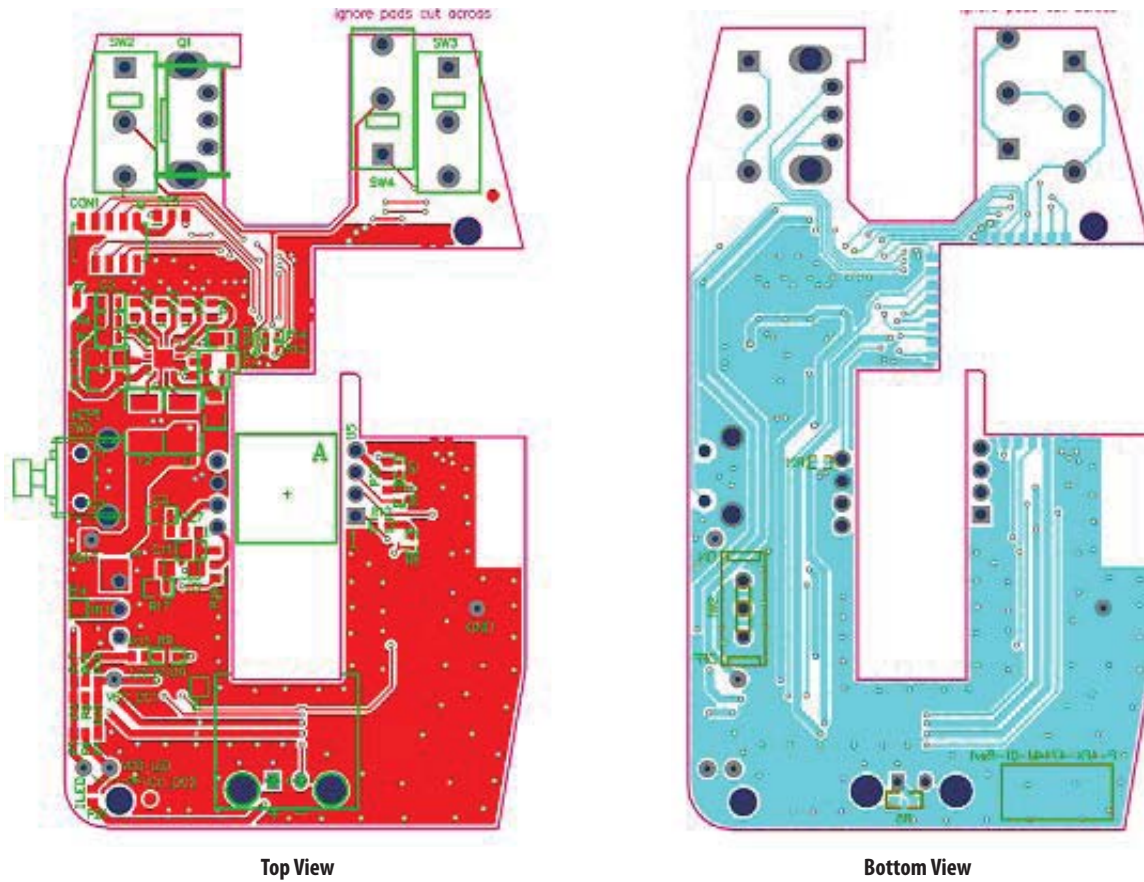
PCB layout for main board of ADNK-2083-ND24 wireless Optical mouse designer's kit
